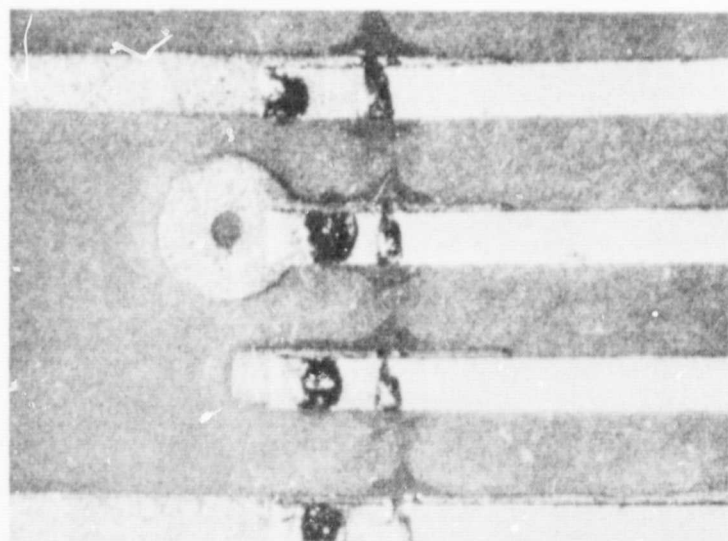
Close-up of laser weld (round spot) and parallel-gap weld on etched circuit board (from Ref. 29)
